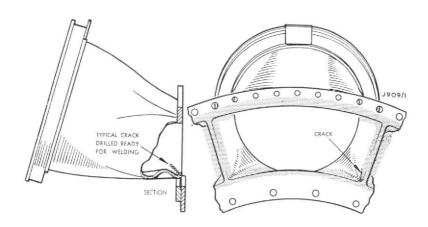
(Right) possible location of cracks in discharge nozzle indicated by shading; (left) example of crack prepared for welding.
